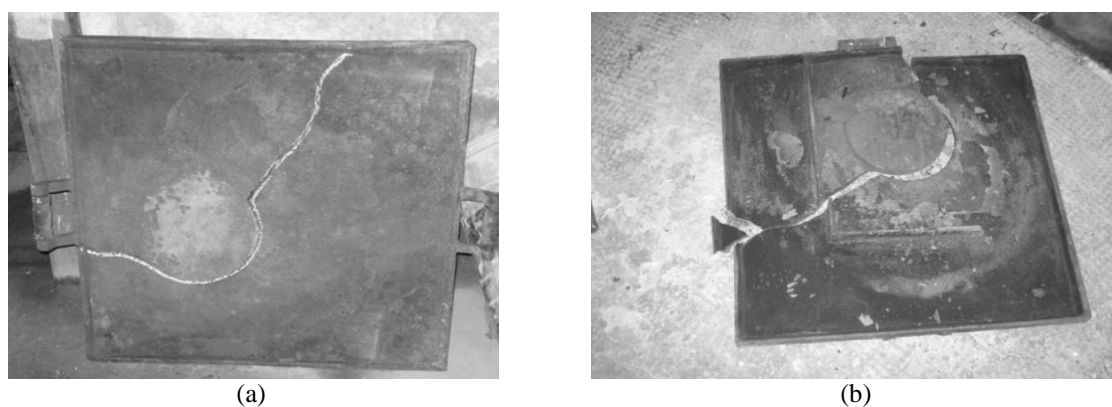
(a) Crack in cast iron plate - top view; (b) Crack in cast iron plate - bottom view.
